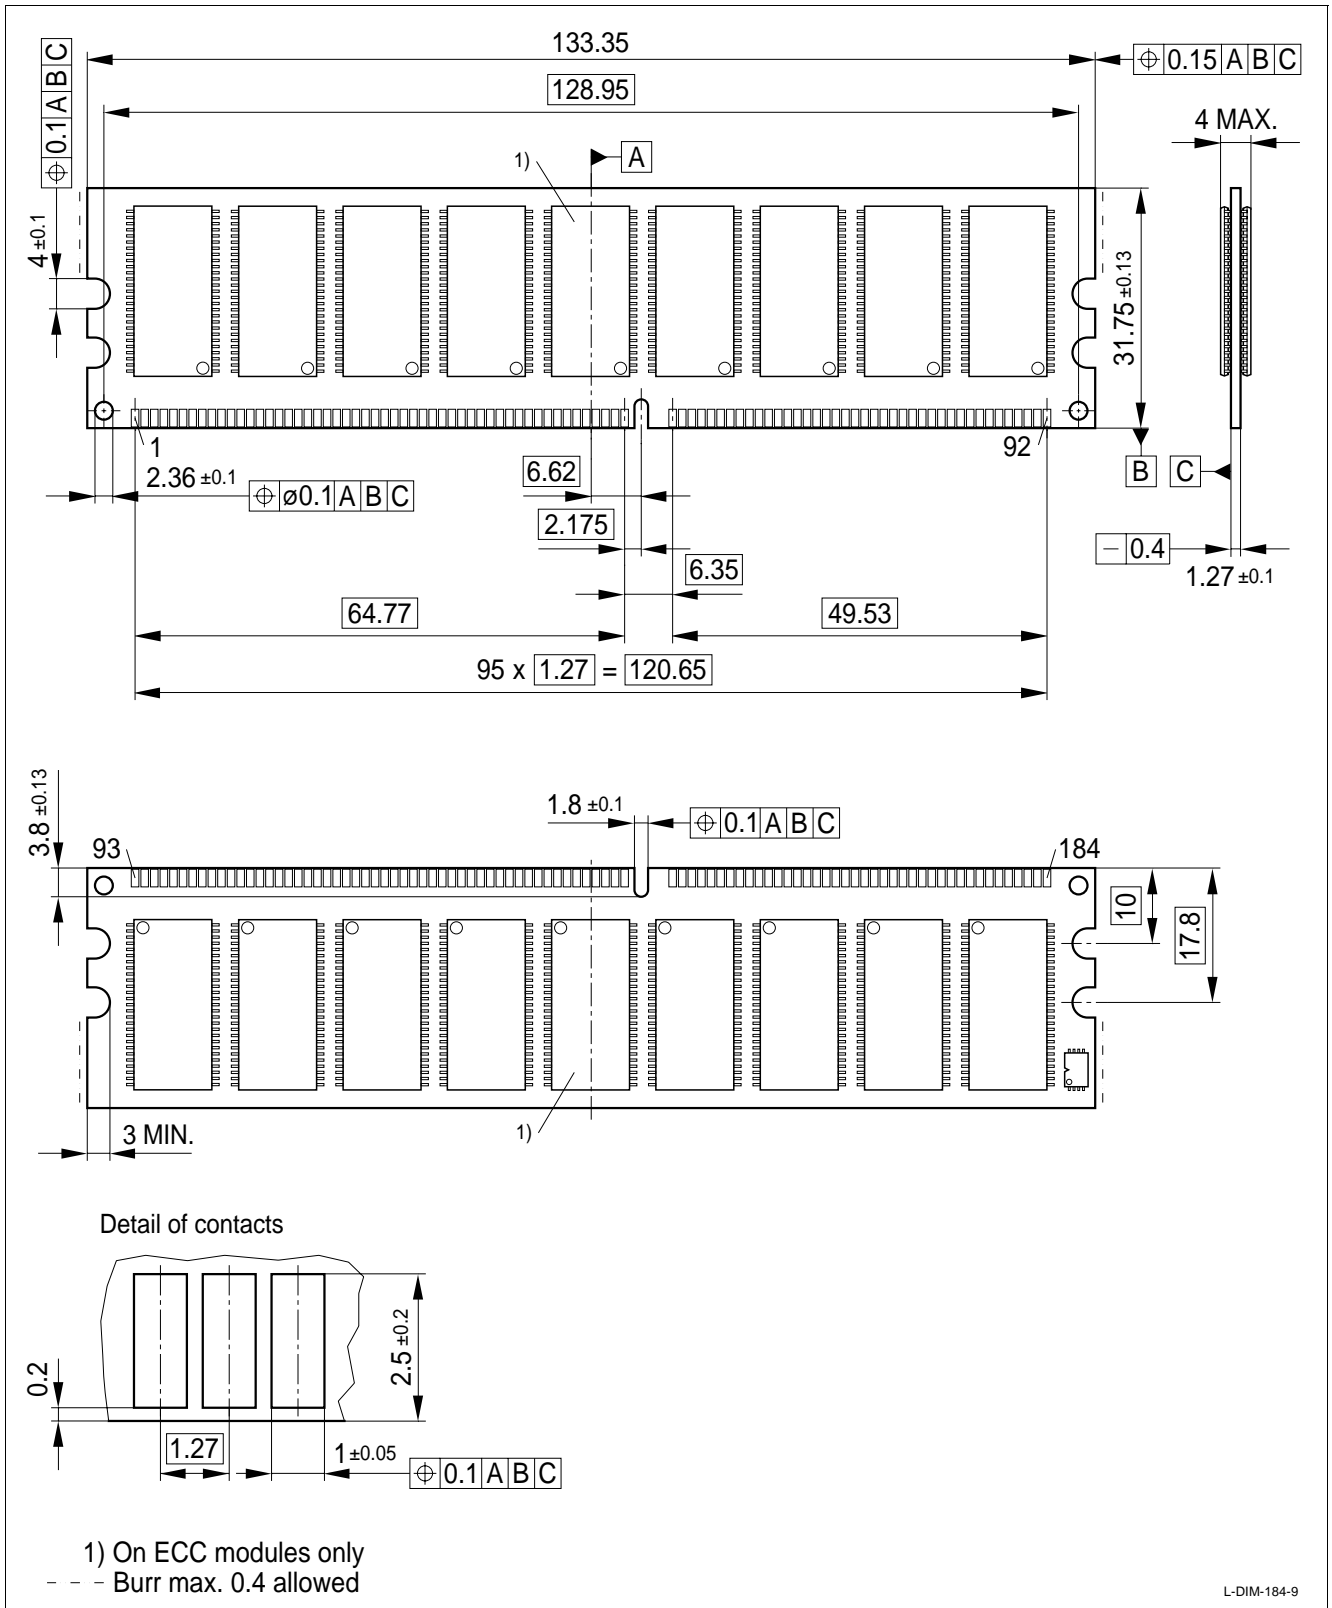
Package Outline - Raw Card B (512 MByte, 2 Rank Module, -7 and -8)
